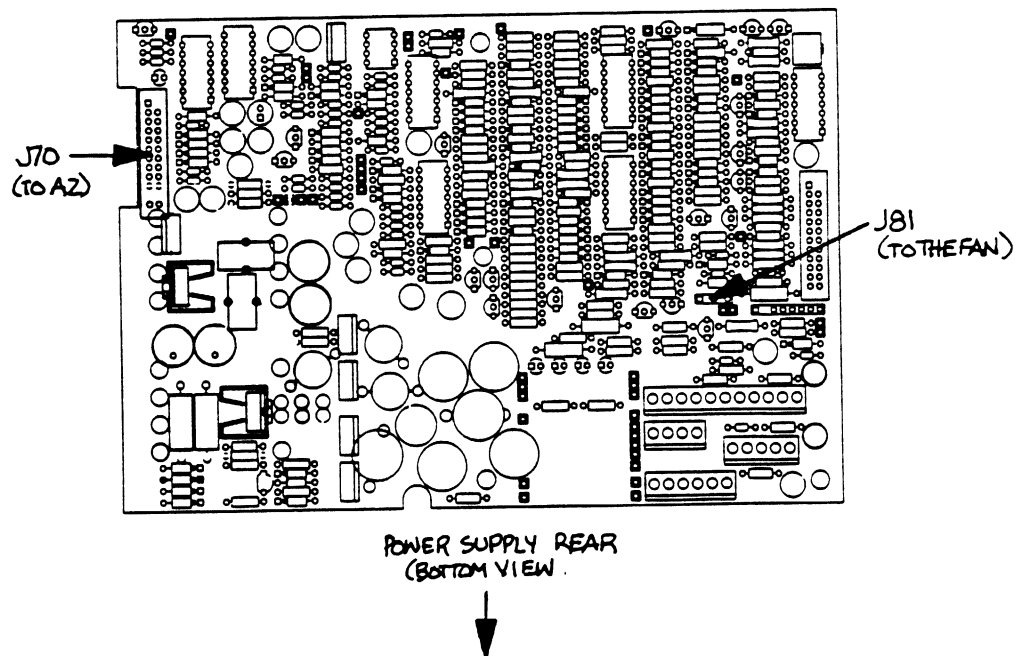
Connector locations for removal of the A3 Control Rectifier Board.
